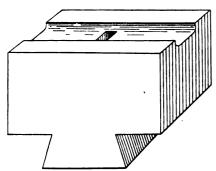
BLOCK FOR FINISHING THE PIECE.
